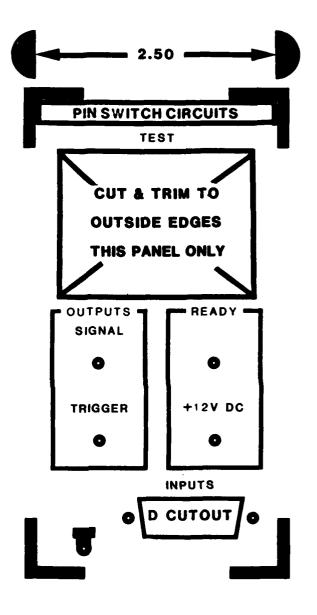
FRONT PANEL METALPHOTO ARTWORK AND CUT AND DRILL GUIDE
